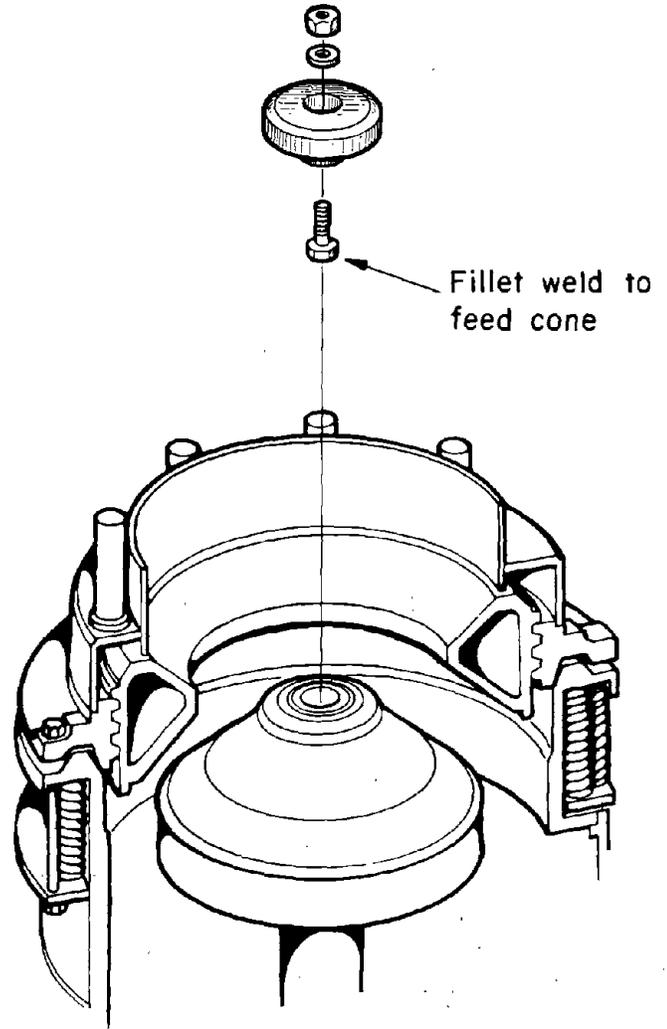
Installation of a molded resilient pad for the mantle hold-down cap.
